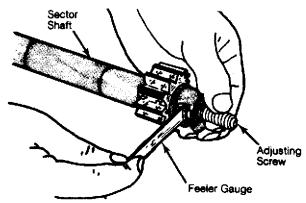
Checking Sector Shaft Adjusting Screw End Clearance
